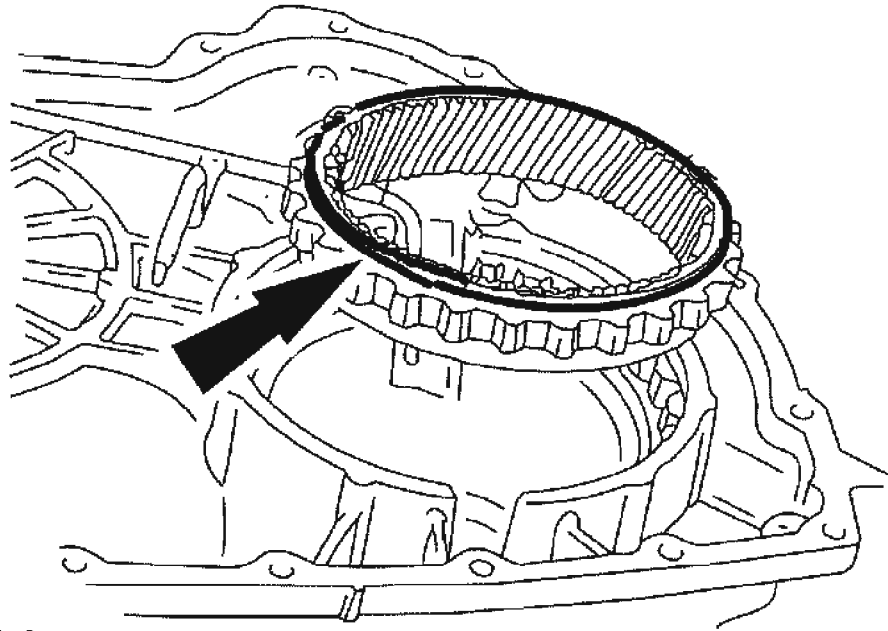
Removing Final Drive Ring Gear Retaining Ring
